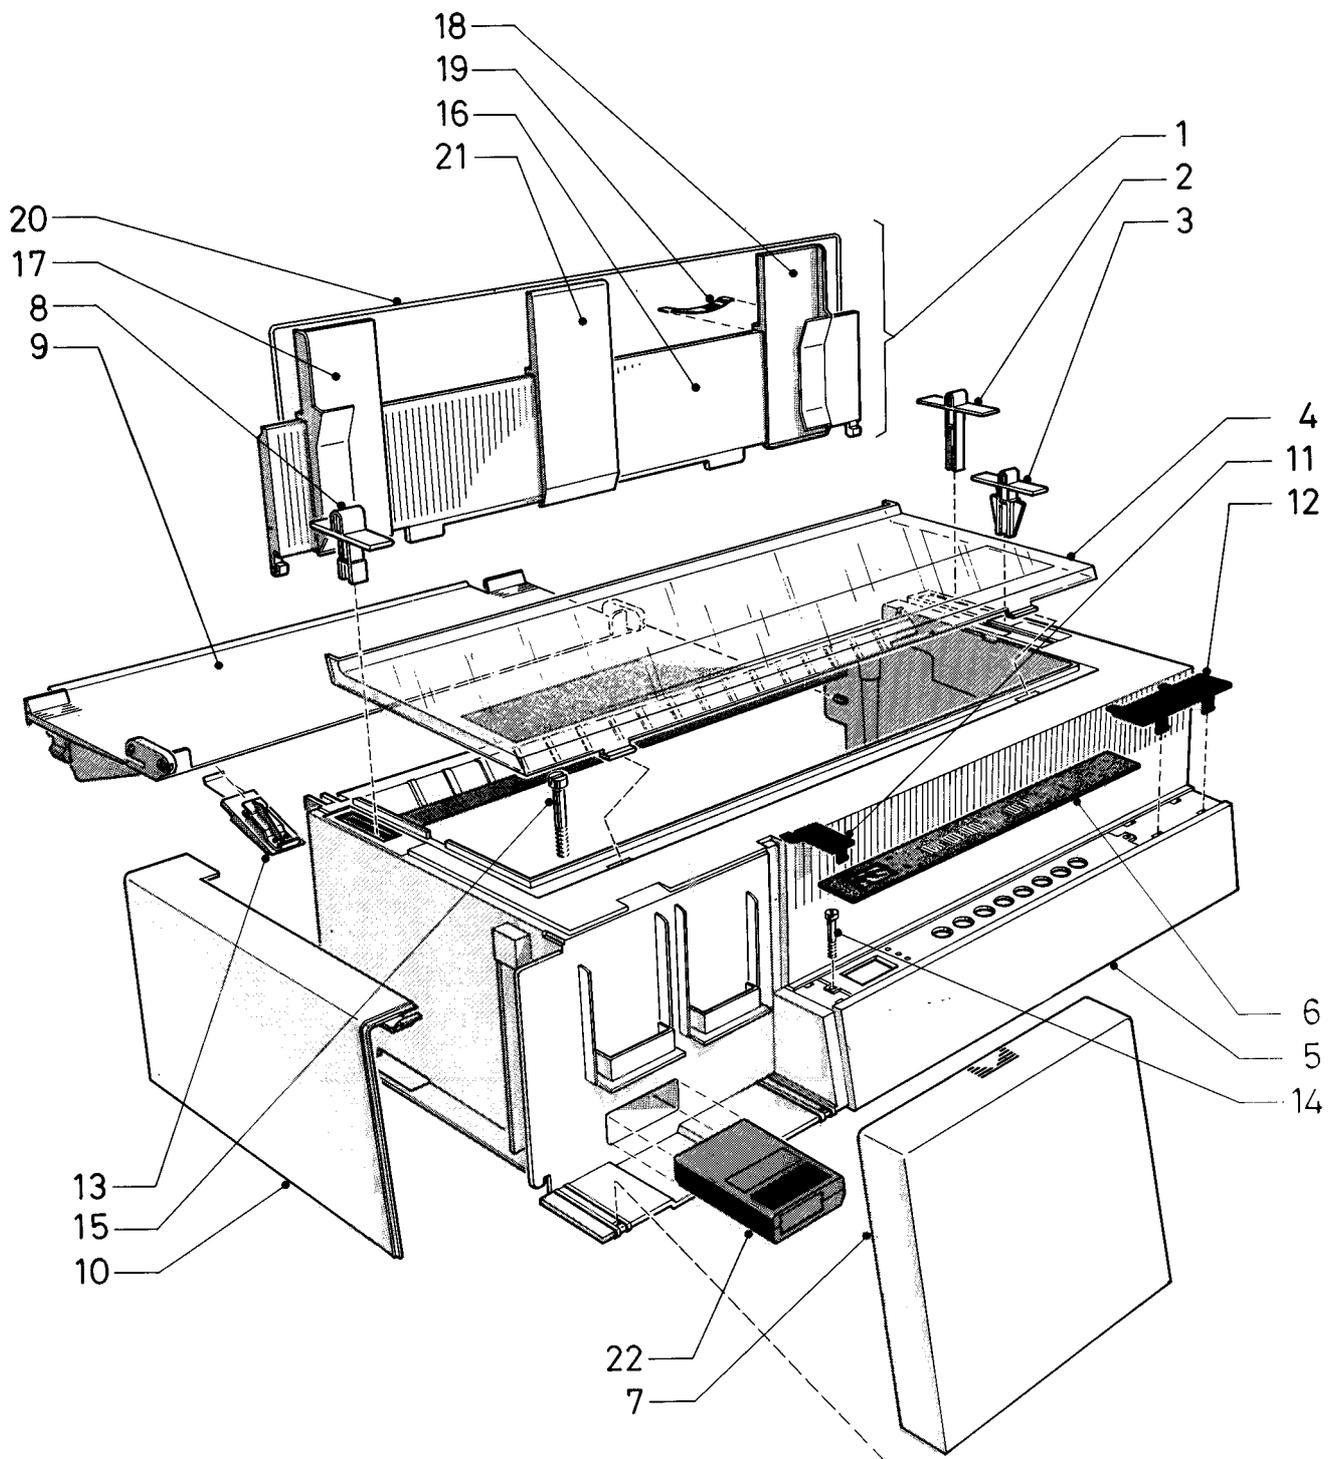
4/41 Covers Assembly and Operator Panel
